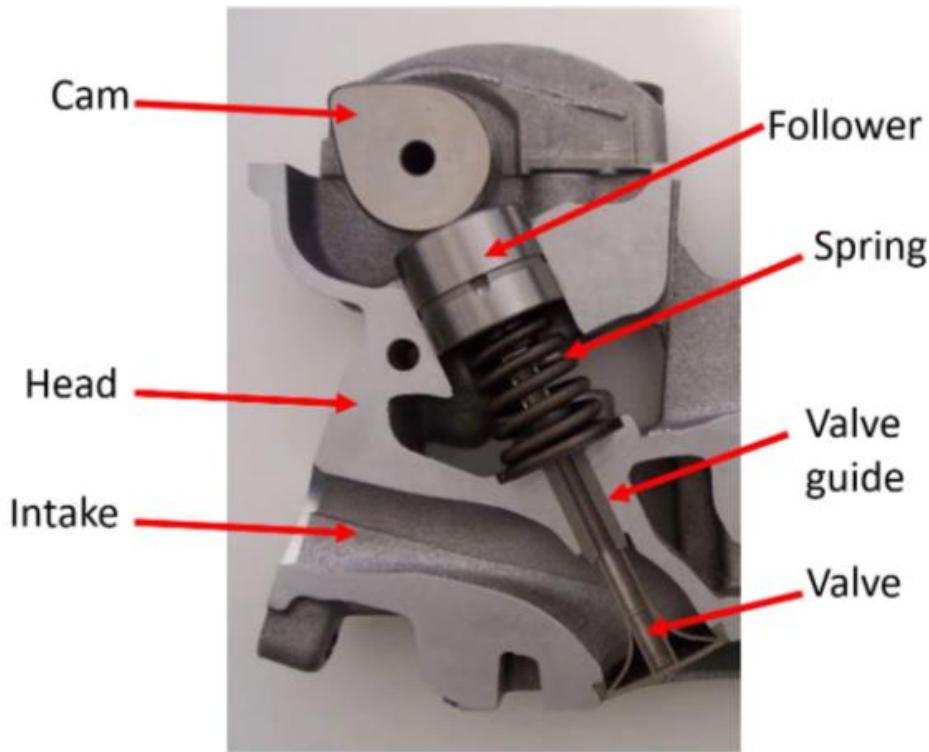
Client Valve Assembly with Relevant Parts Labeled
